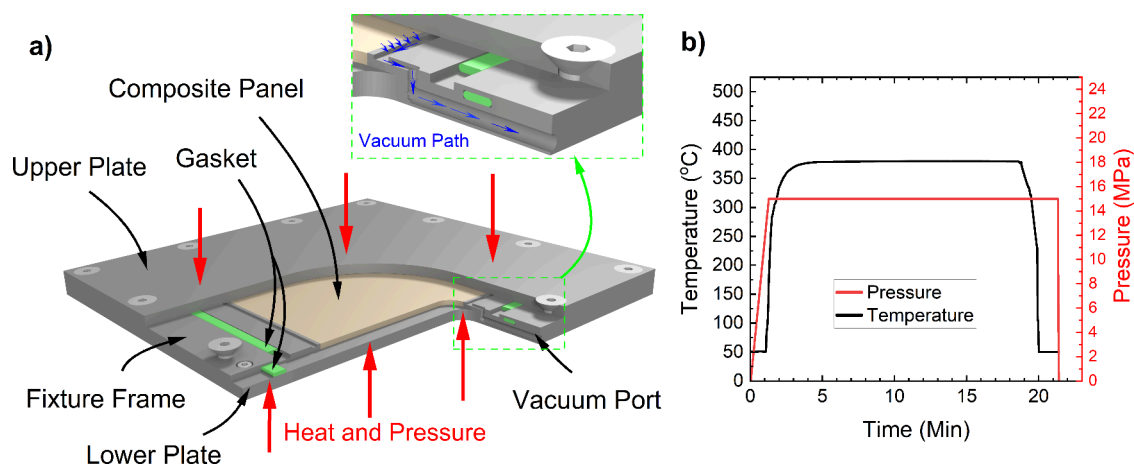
(a) Cross-sectional schematic view of the vacuum-assisted annealing mold. The panel is inserted into the mold, and the mold is fully assembled before placement in the press. Heat and pressure from the hot press are applied directly to the flat surfaces of the mold upper and lower plates. (b) Annealing cycle of the composite panels, indicating measured processing pressures and temperatures.
